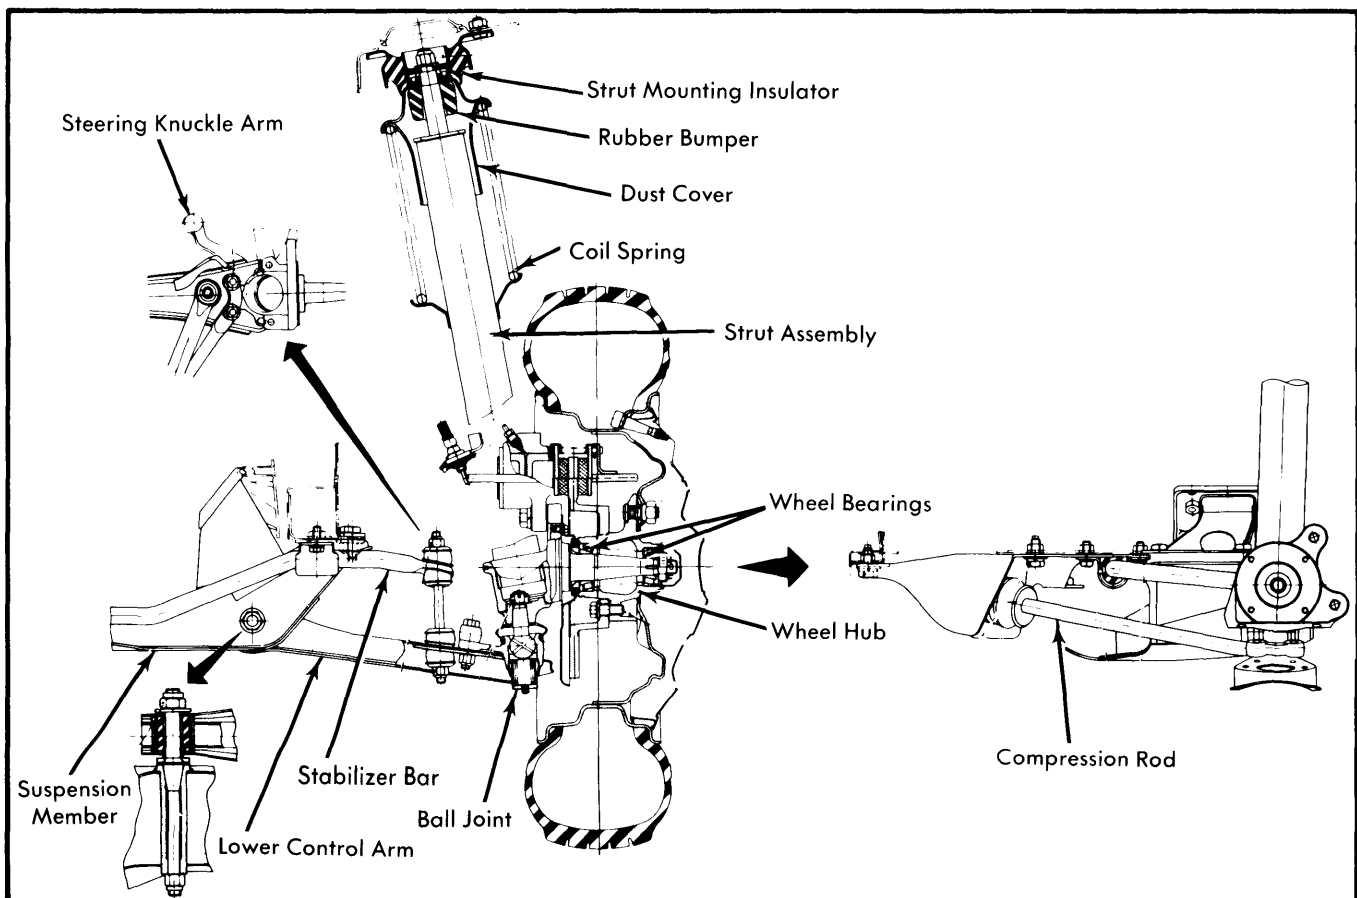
Assembled View of B210 Front Suspension, with Some Items Shown in Detail (All Other Models Are Similar)
